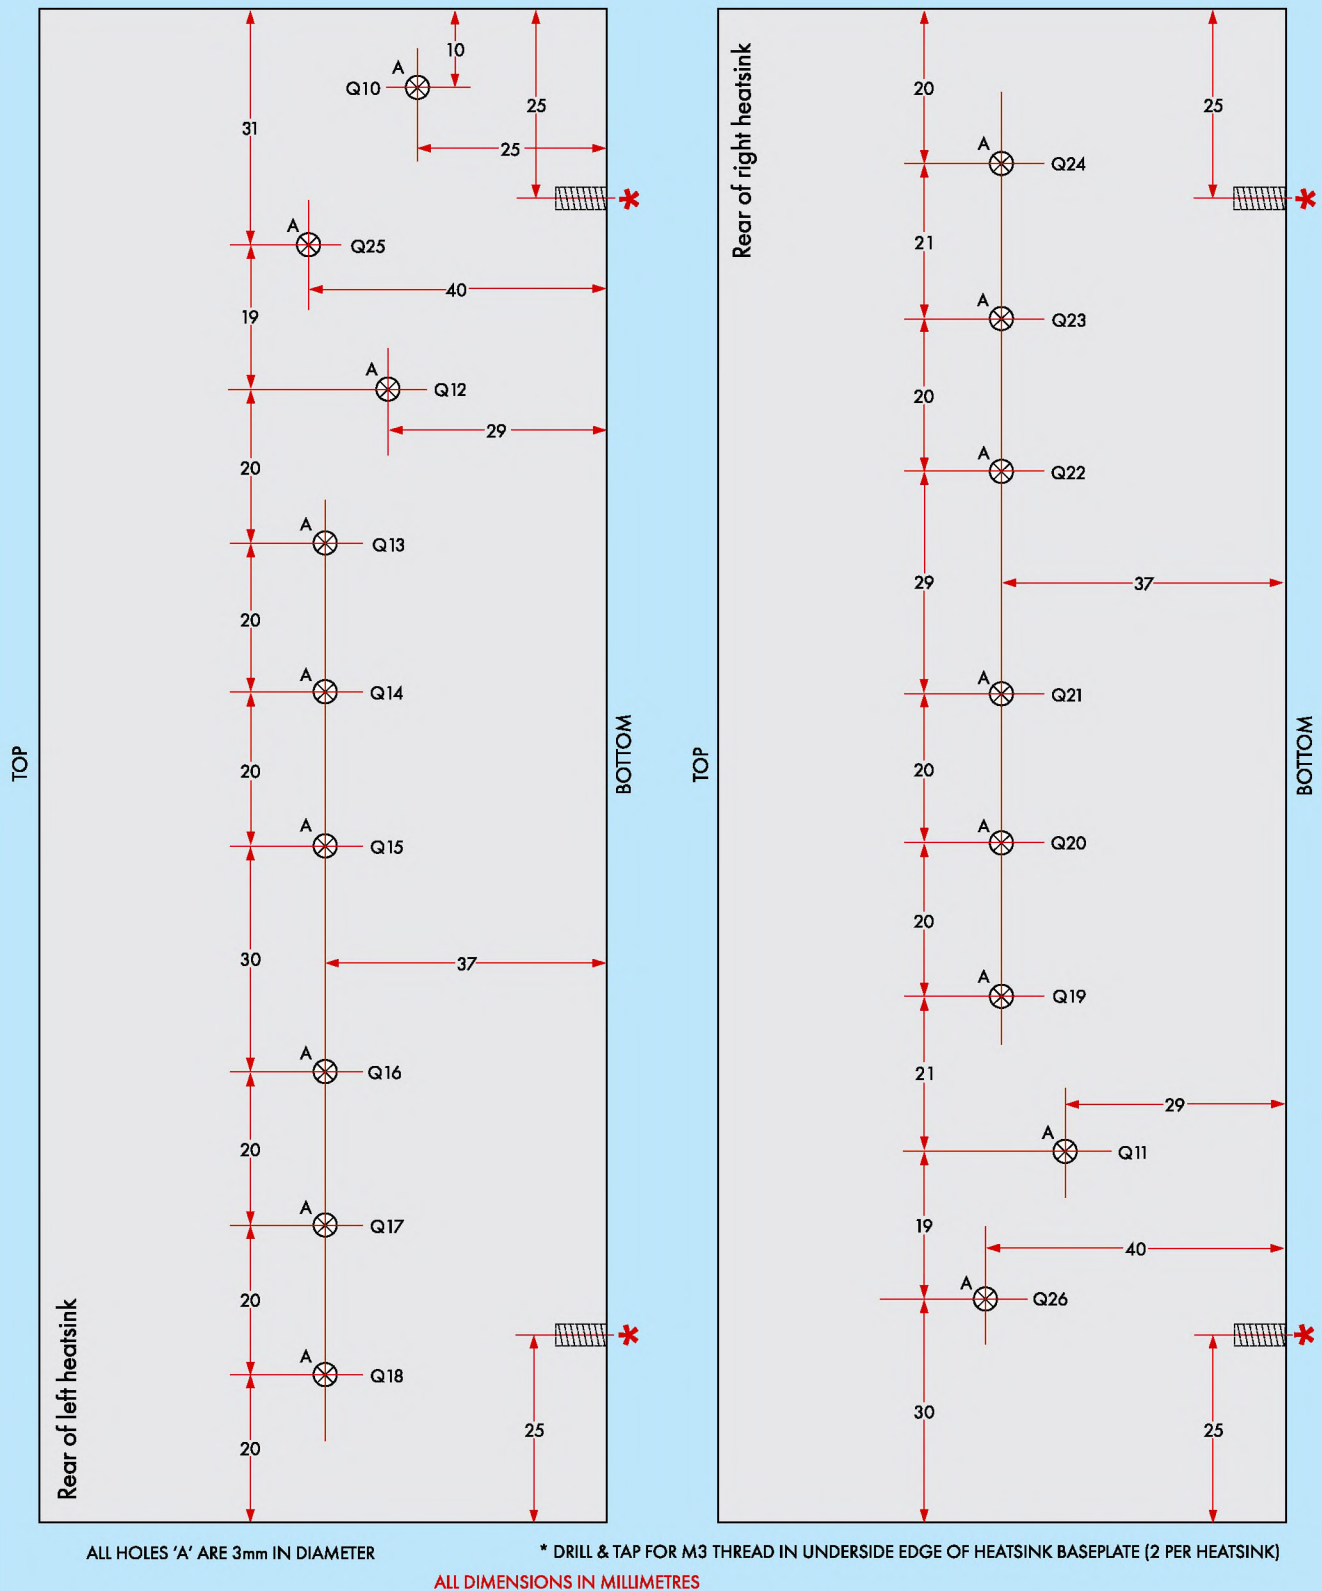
drill the two side-by-side heatsinks as shown here. You can drill the transistor mounting holes through the heatsink using a 3mm bit and then mount the transistors using screws, nuts and washers. The underside edge is drilled to 2.5mm and tapped for M3 in two places on each heatsink so that it can be mounted to the chassis.
